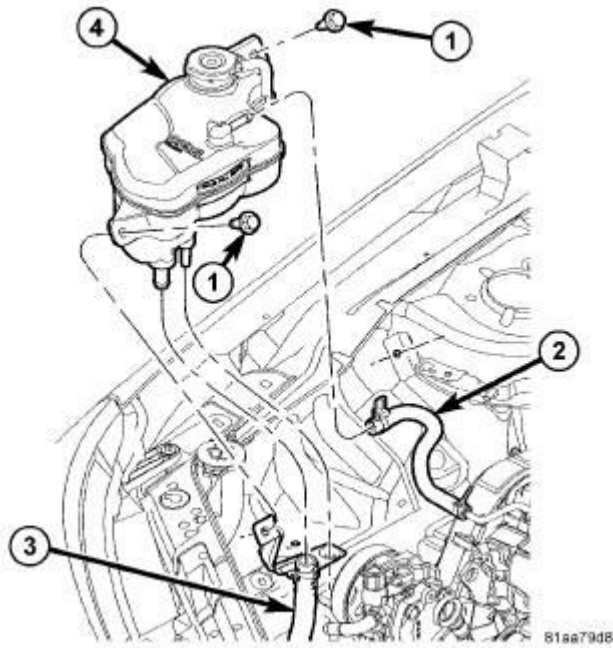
COOLANT RECOVERY CONTAINER - PRESSURE SYSTEM
